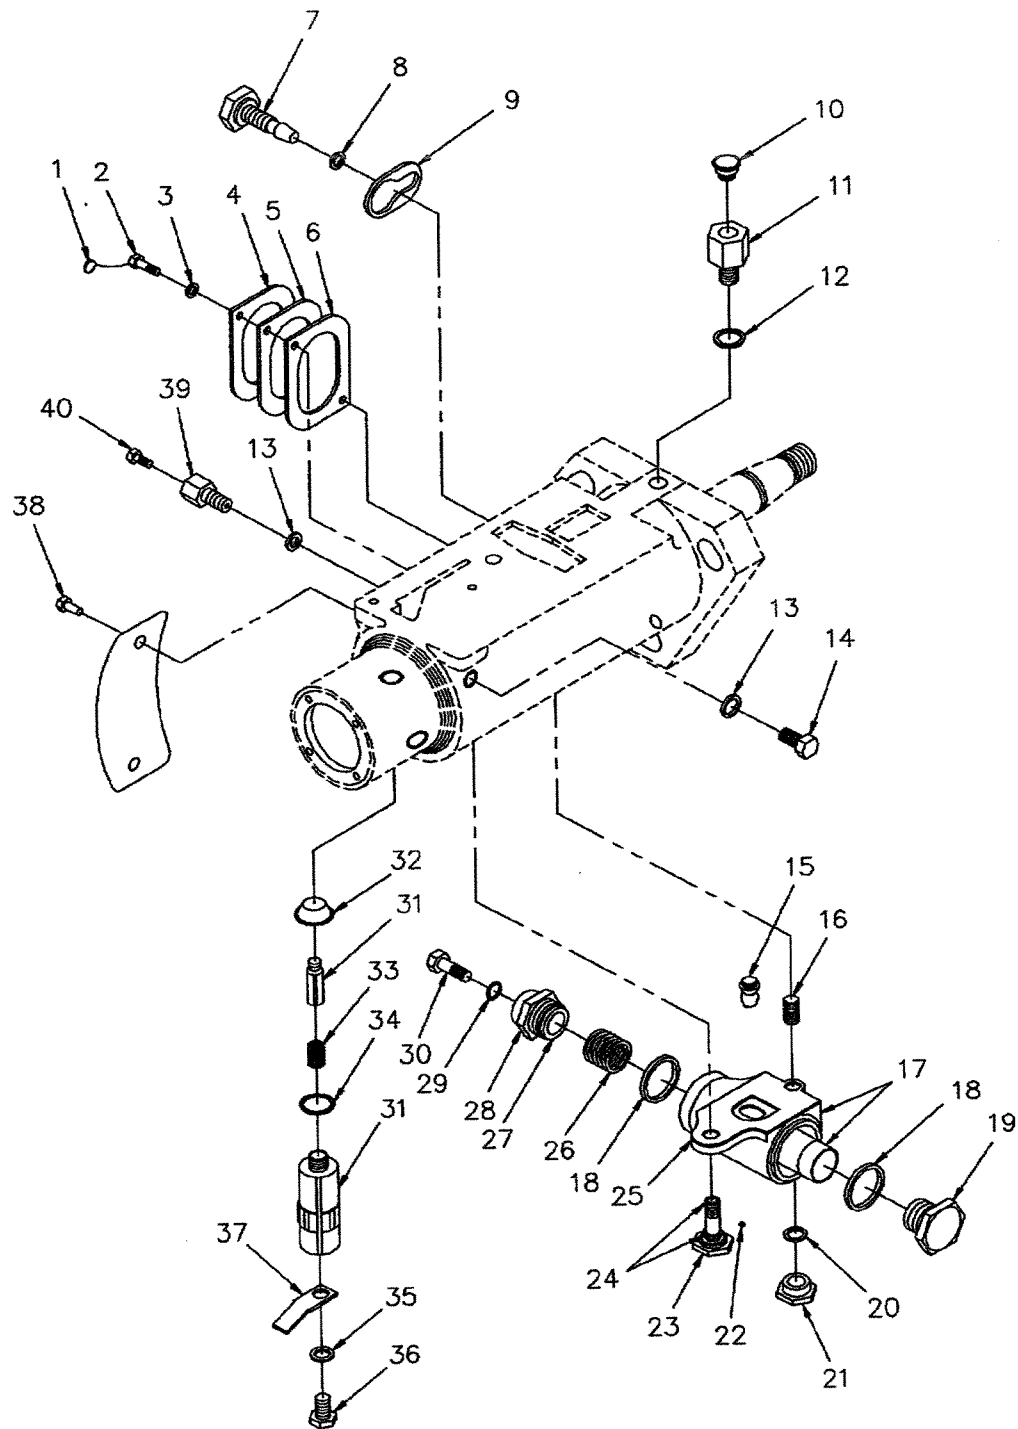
Fuel Injection Pump Hydraulic Head and Housing Attachment
